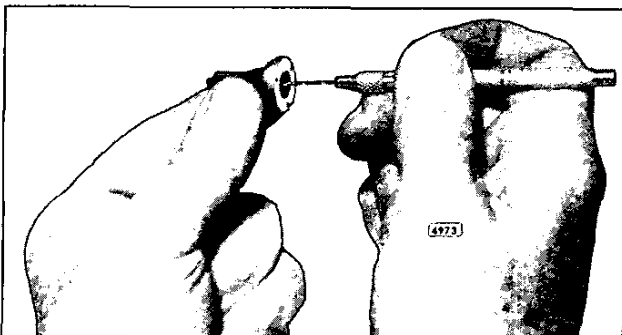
Cleaning Injector Spray Tip with Tool J 24838
